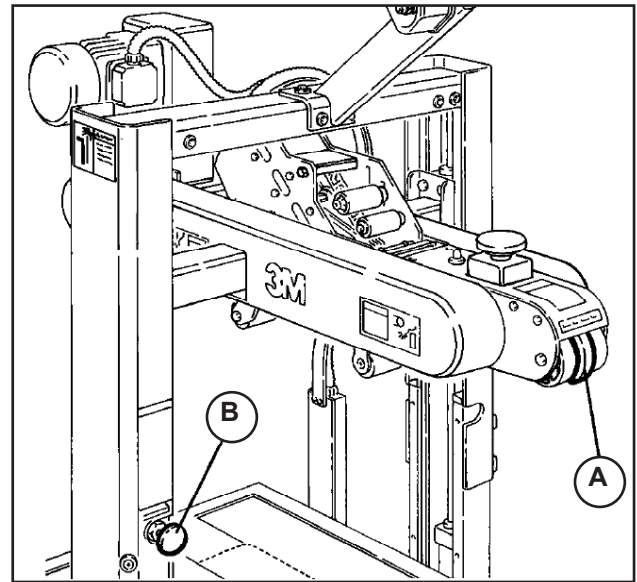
Air Regulator/Gauge, Top Drive Assembly
